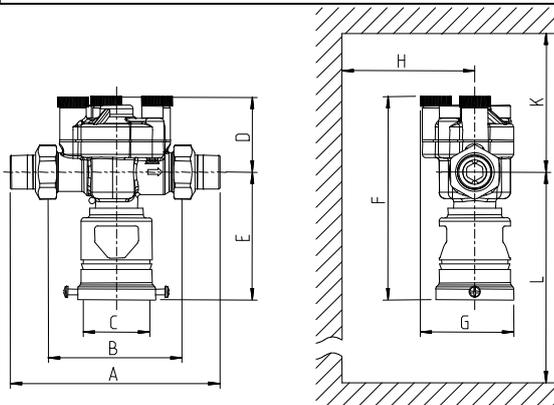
Dimensional drawing of Euro system separator GENO-DK 2-Mini
